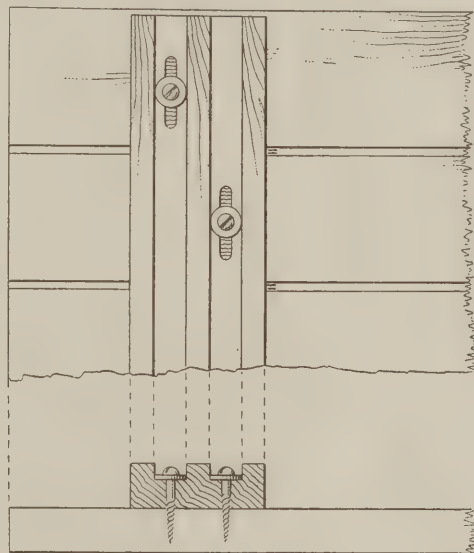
An Enlarged-Plan View of a Corner of the Drawing Board.
